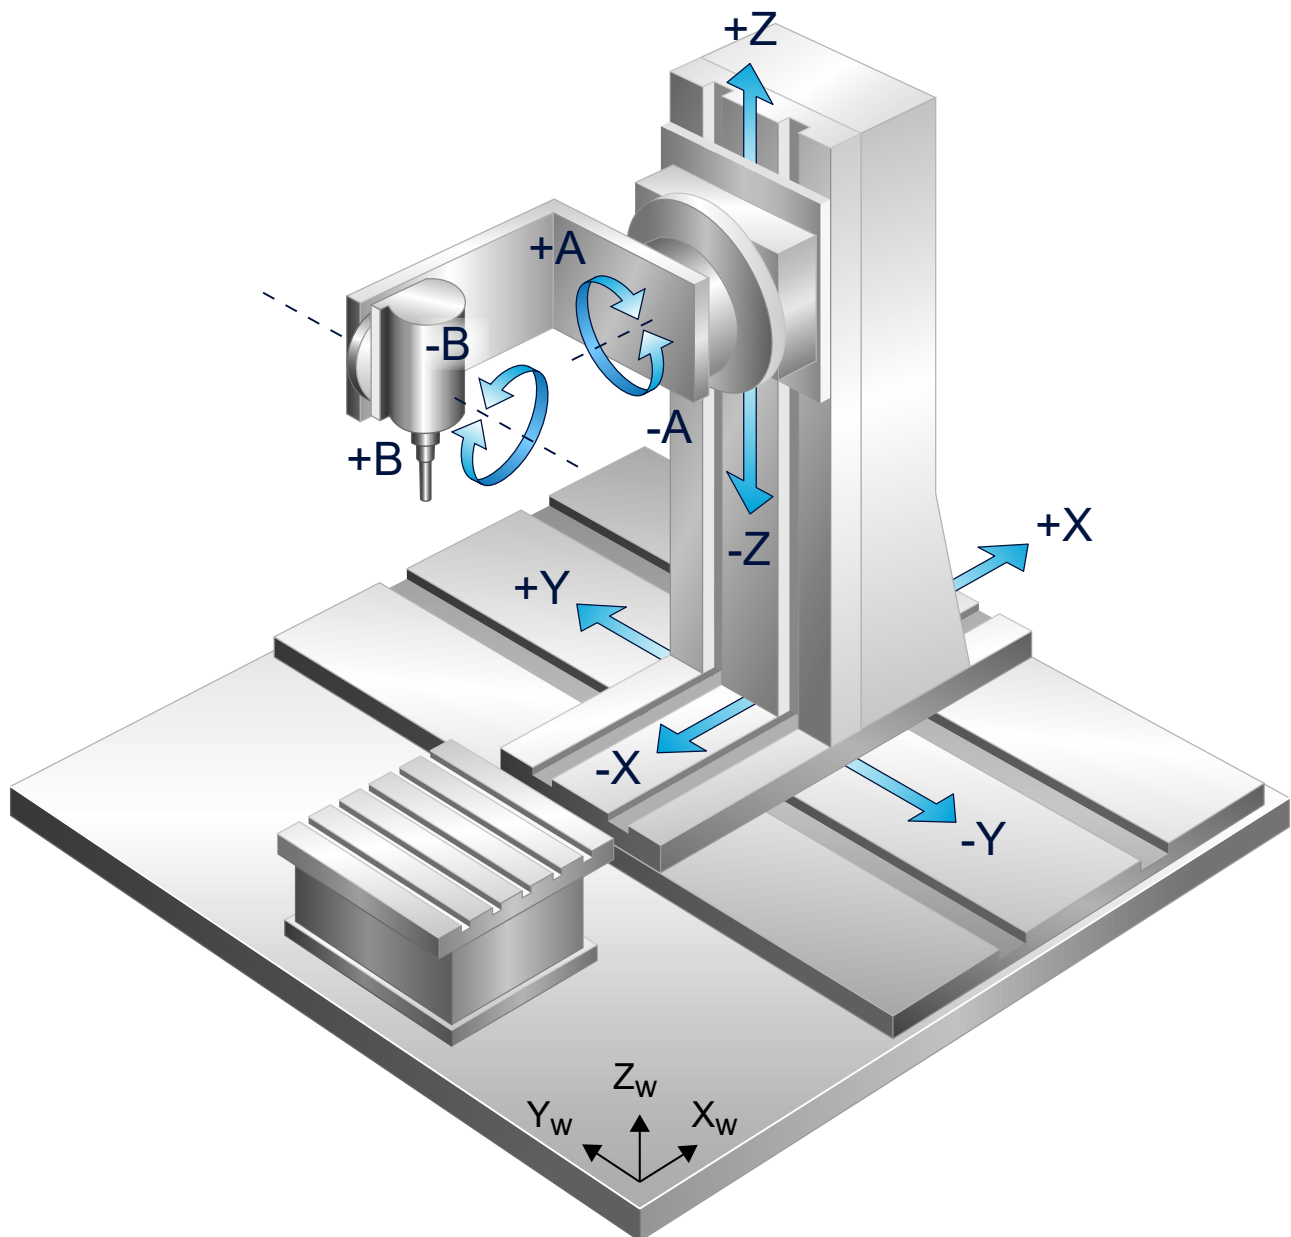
Kinematics of the 5-axis milling machine with rotary/swivel head
